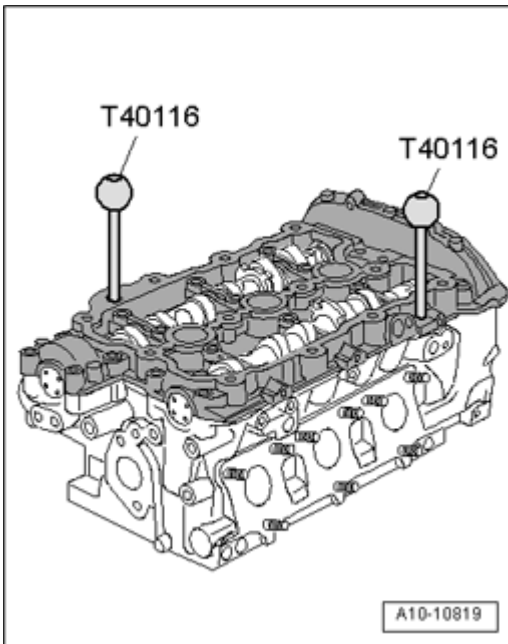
Inserting locating pins T40116 in guide frame and cylinder head
